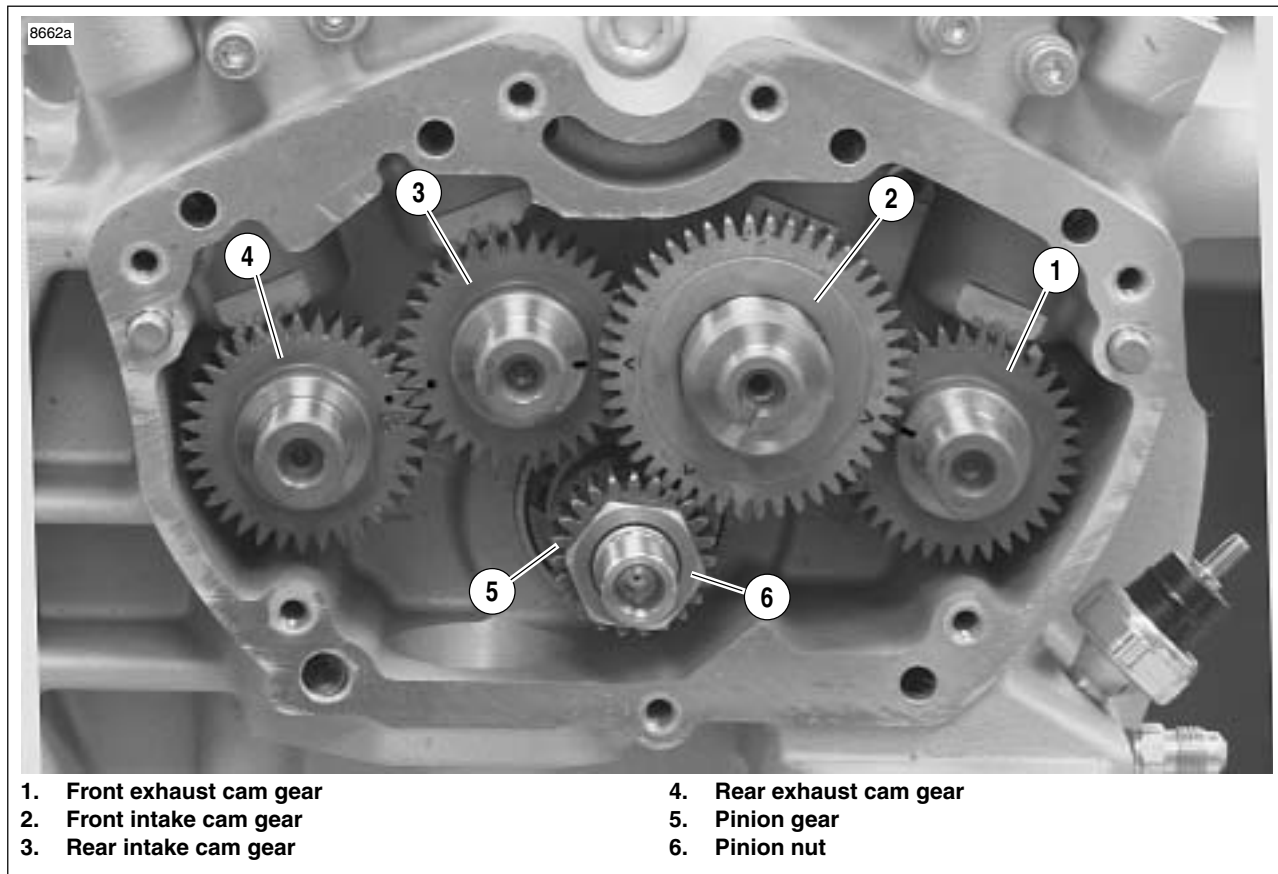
Cam and Pinion Gear Location and Timing Mark Indexing
